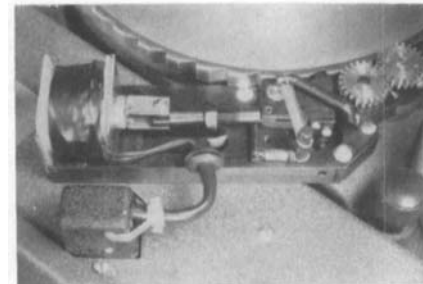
Solenoid and pawl assembly with magazine rotation drive system at upper right.
